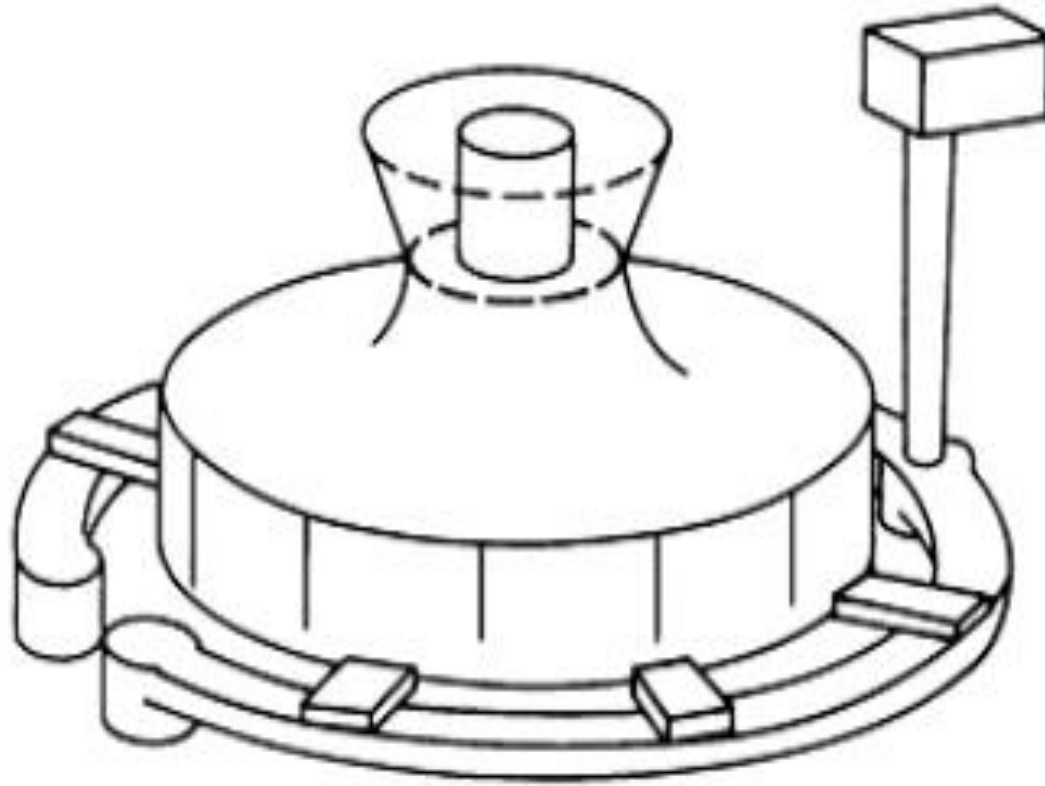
Method of running a pump impeller with a well at the end of the runner.
